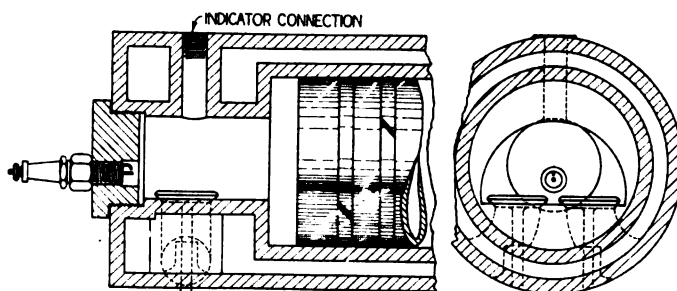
Diagram of engine cylinder showing shape of combustion chamber and location of indicator
